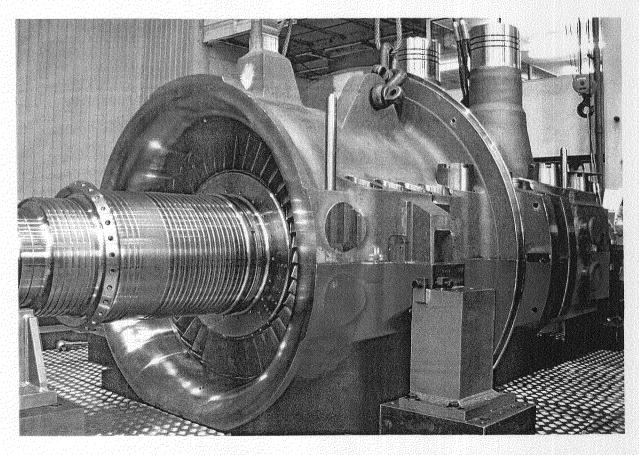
HP FRONT BEARING T1 (RE-USED)
